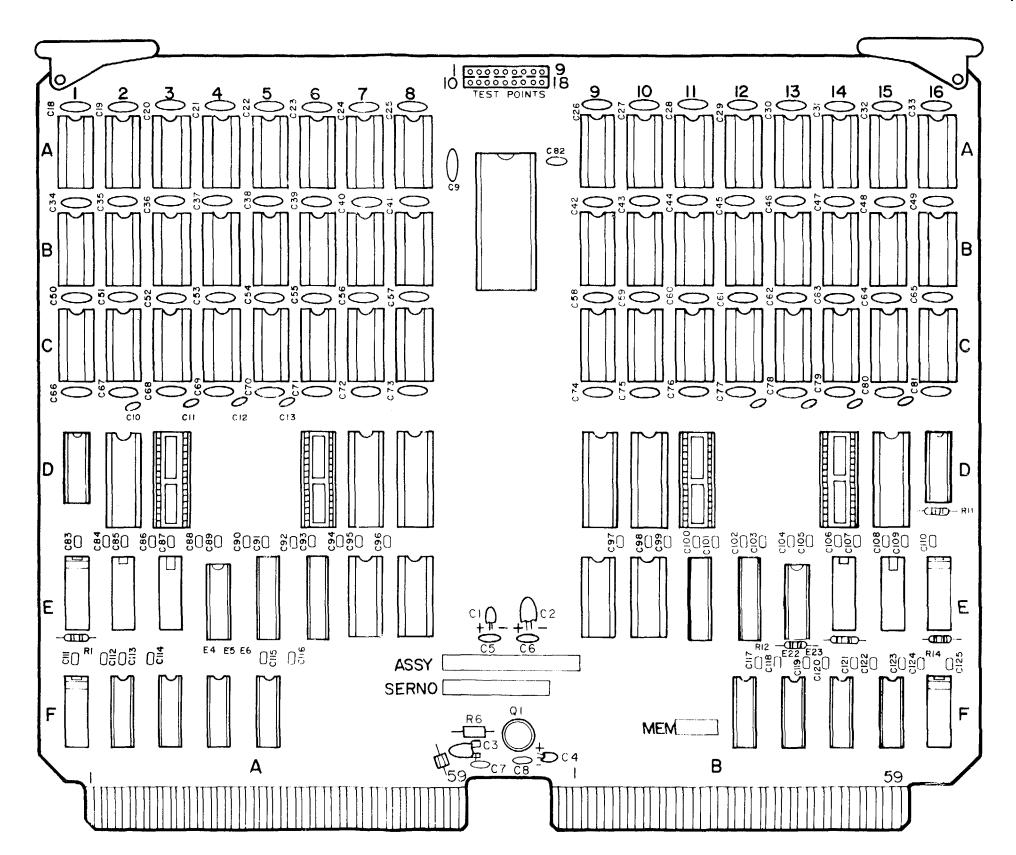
Memory Board 0100-3754 Assembly Drawing
